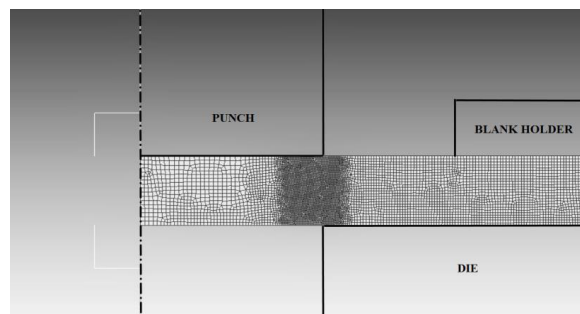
The geometrical model of the blanking process and the FEM meshes of the workpiece
